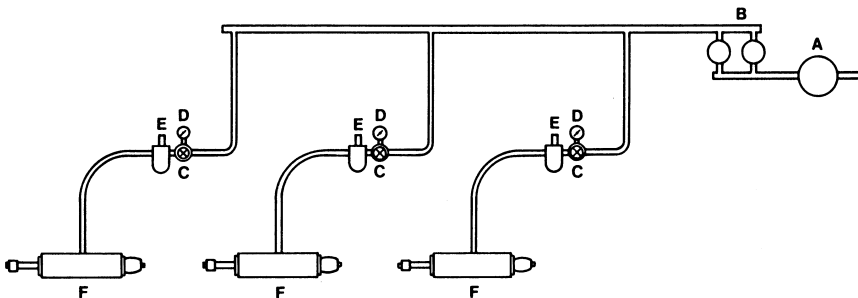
Oil mist system for machine tool spindles (from SKF, 1992, with permission of SKF).
